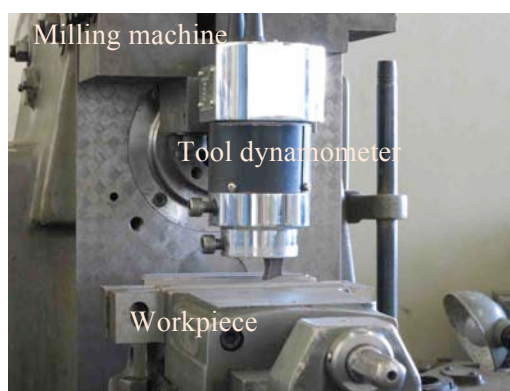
Experimental arrangement. Horizontal milling machine and Tool dynamometer
